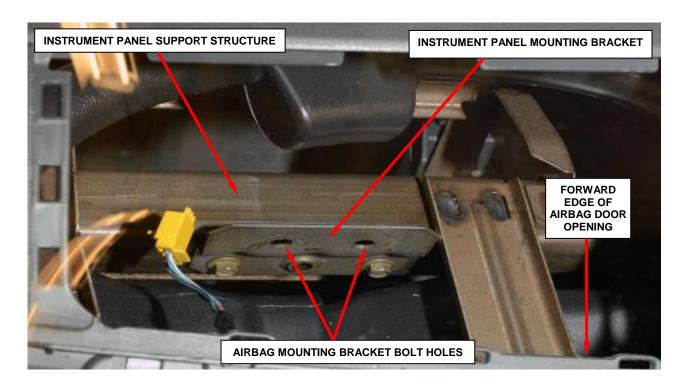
Instrument Panel Mounting Bracket Viewed through Windshield and Airbag Door Opening
